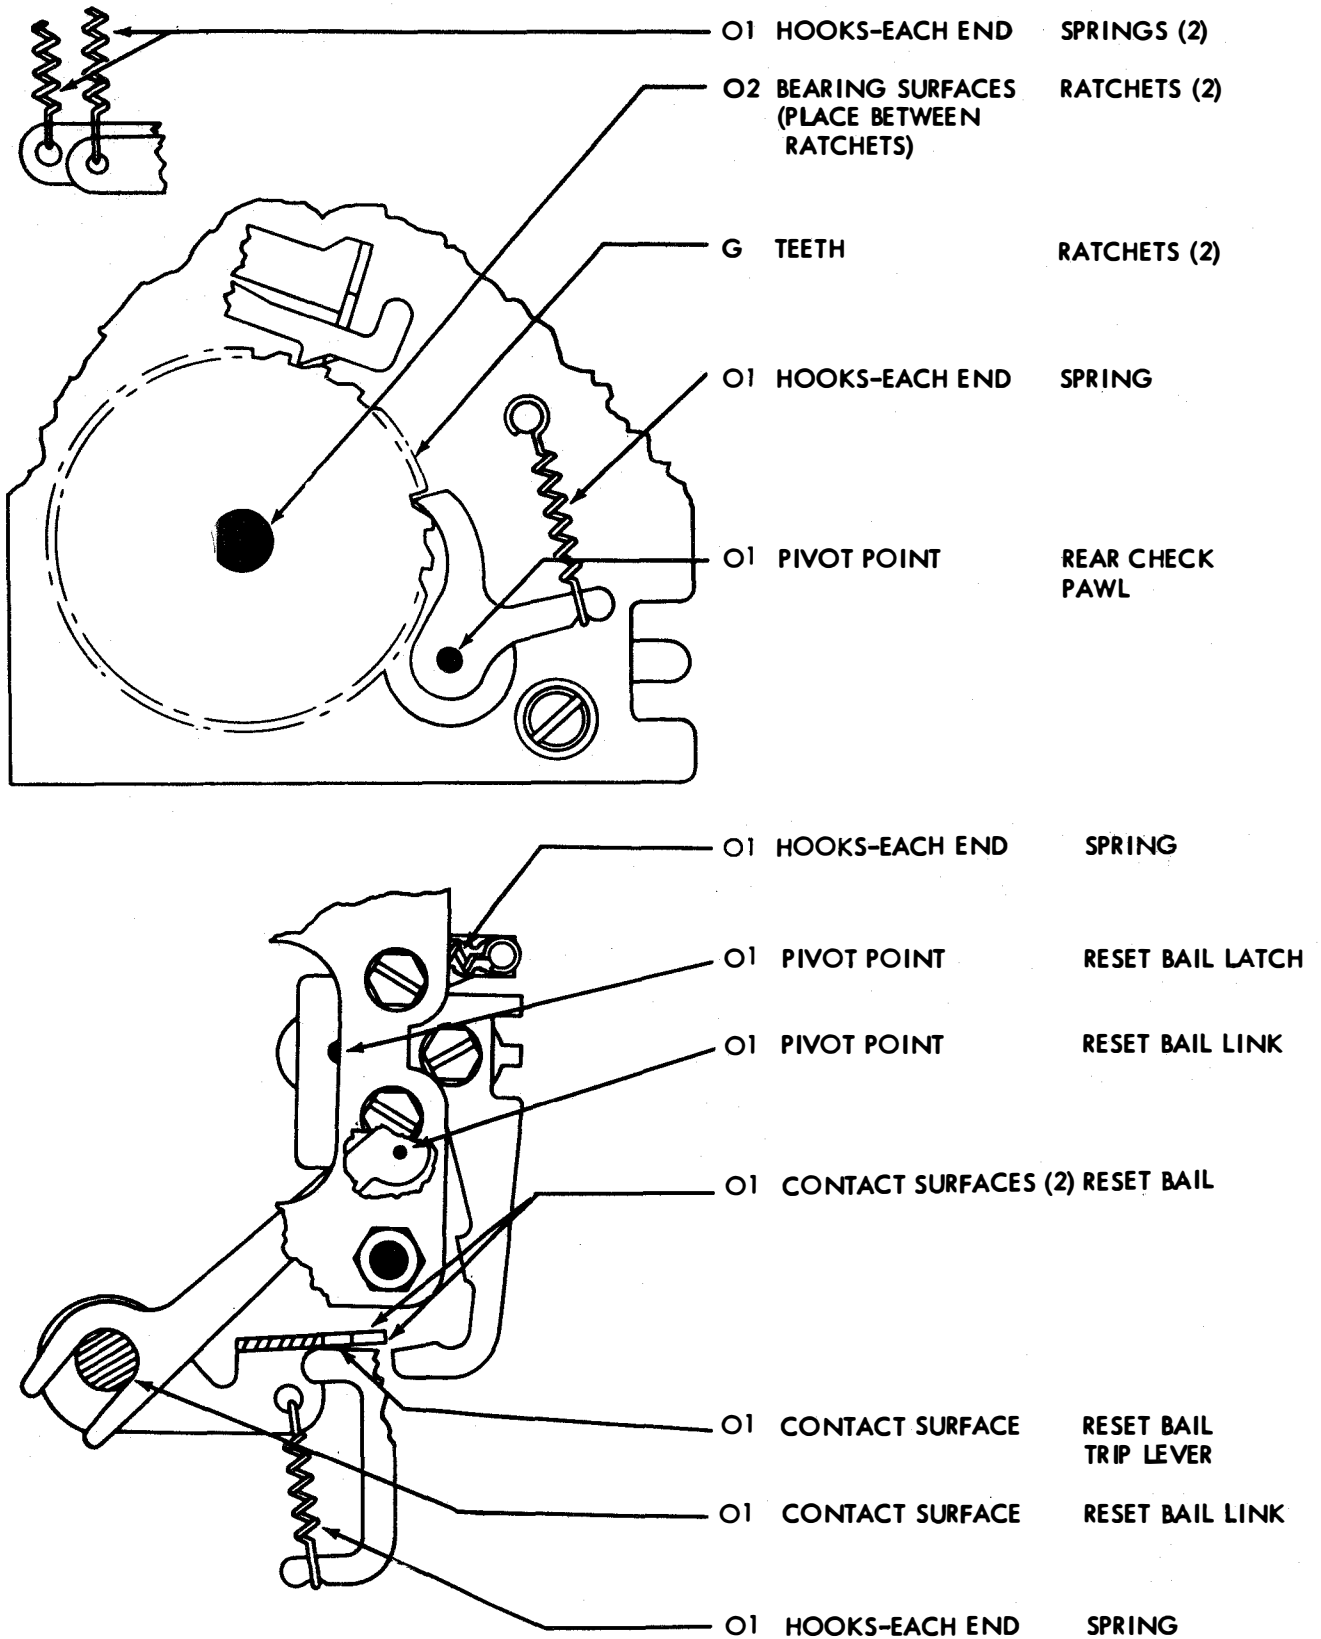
Automatic and Remote Control Noninterfering LTRS and BLANK Tape Feed-Out Mechanisms (Sheet 3 of 3)
